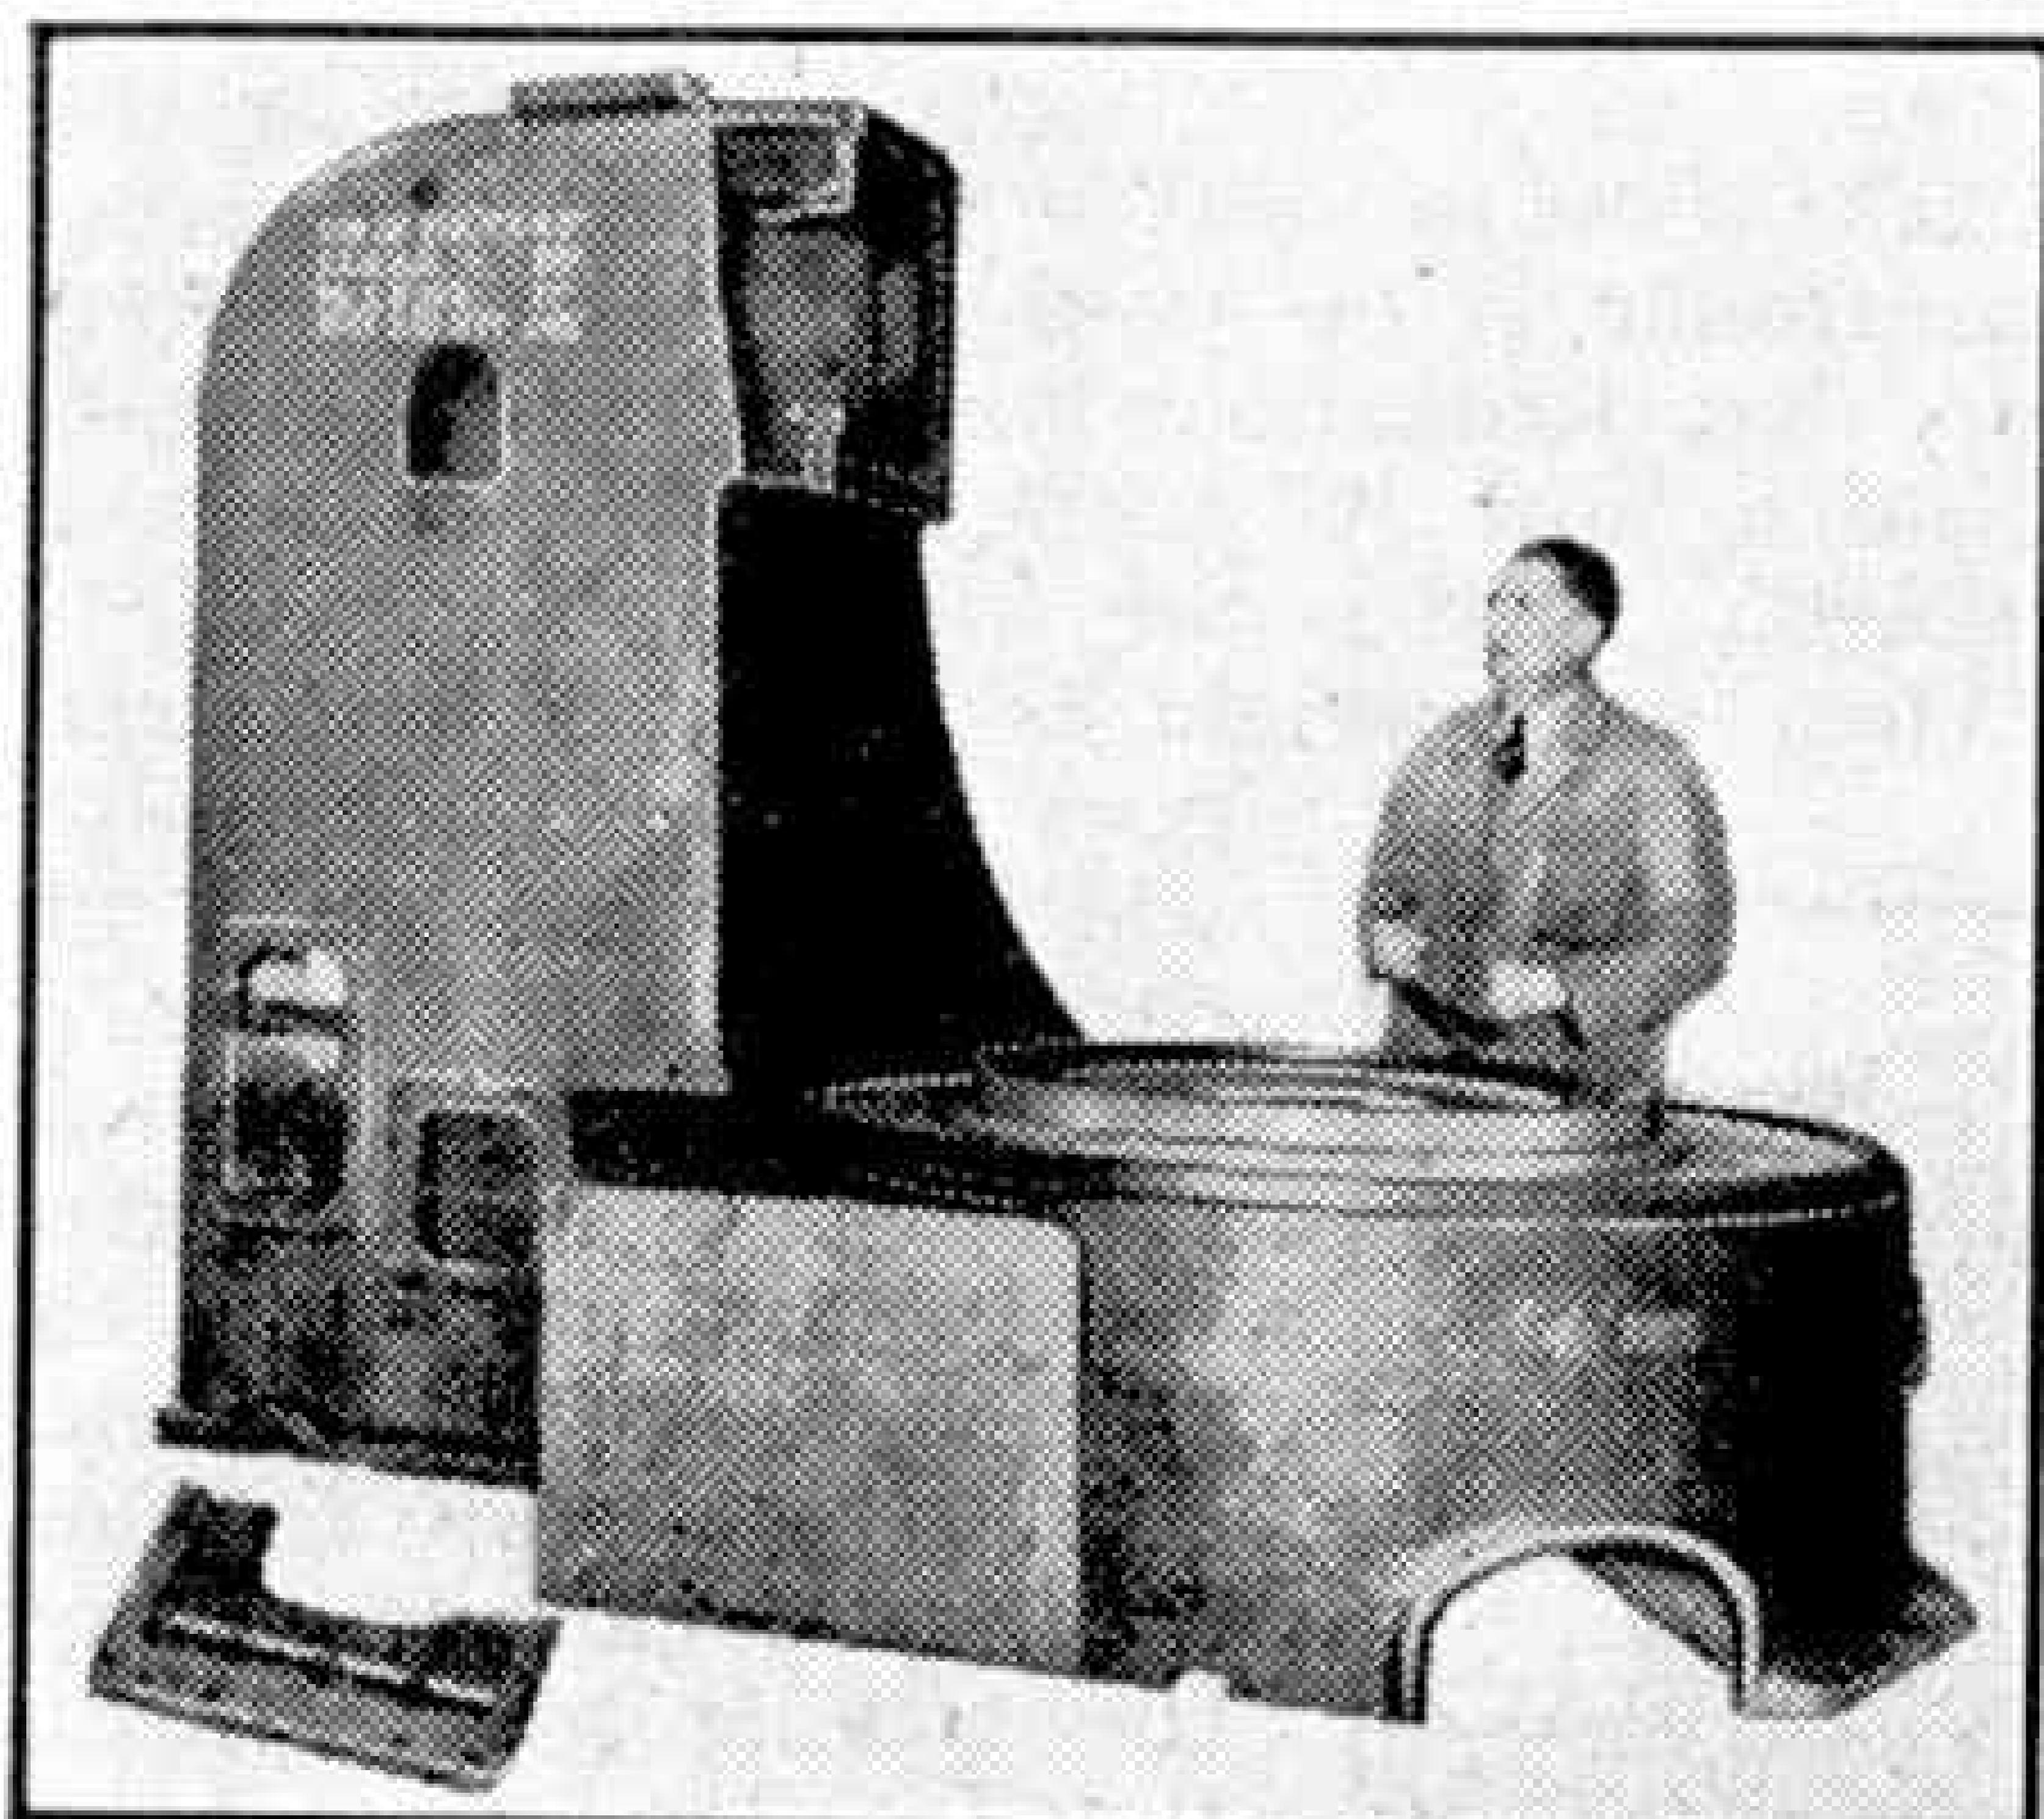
This picture shows a damaged casting weighing over 6 tons, and in the picture below is seen the repair as completed in the Barimar Works by welding.
